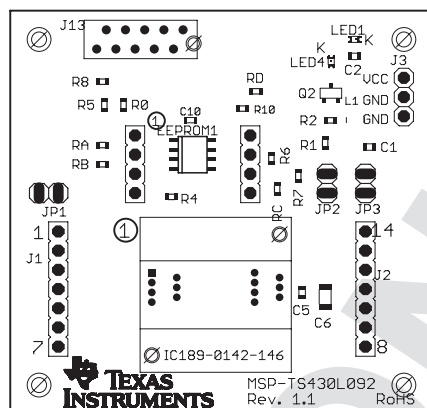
MSP-TS430L092 Target Socket Module, PCB
